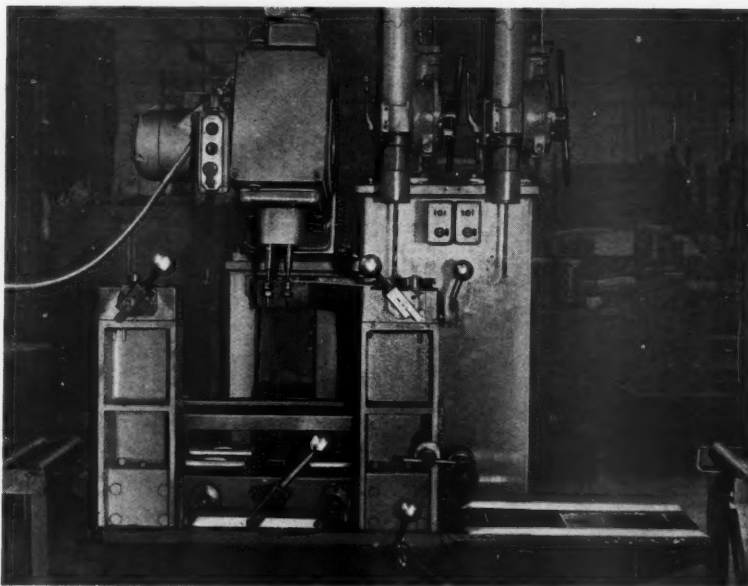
Three station fixture used in conjunction with a two-spindle tapper and two single-spindle drilling heads.
